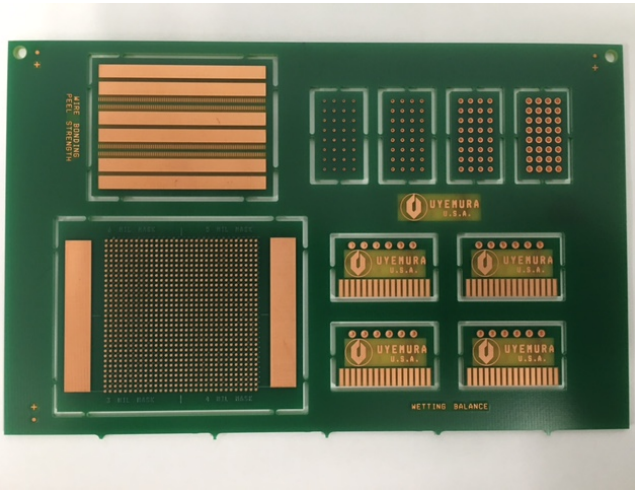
Test board showing wetting balance coupons, BGA array and wire bond array
